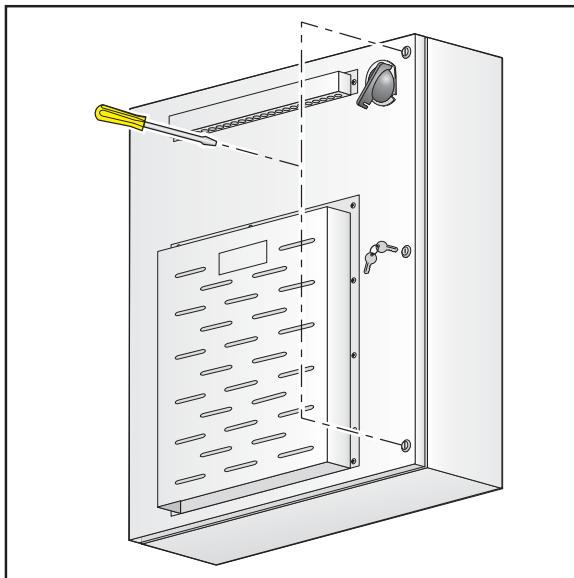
Unscrew the two screws to open the cabinet door. (Control cabinets require a key)
